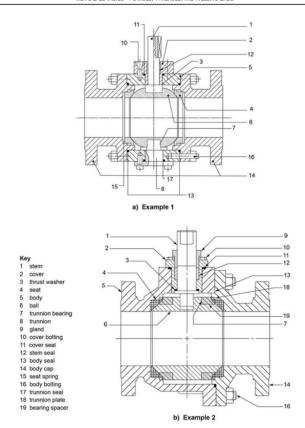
Typical Trunnion-mounted Ball Valve Components (Split-body Valve Illustrated)—
